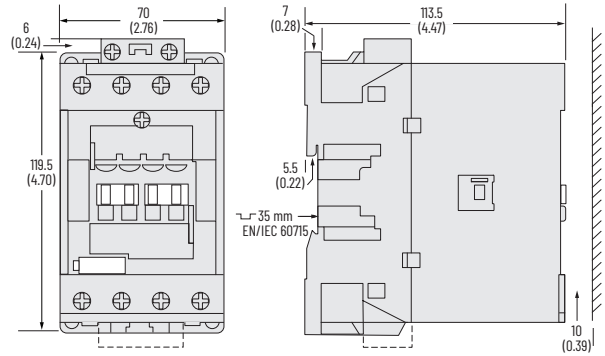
100-E40...100-E52 4-Pole Contactors with Front-mounted Auxiliary Contact
